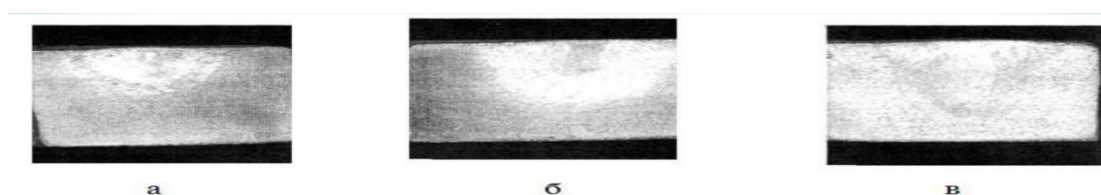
The influence of the composition of the protective medium on the formation of a seam during welding with direct polarity current (x3.5): a – welding in argon; б – welding in neon; в – welding in helium
